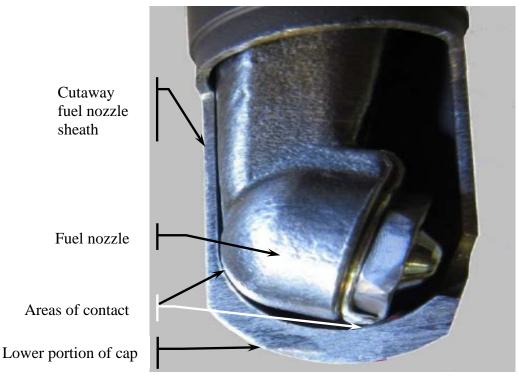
Fuel Nozzle inside Cutaway Sheath
